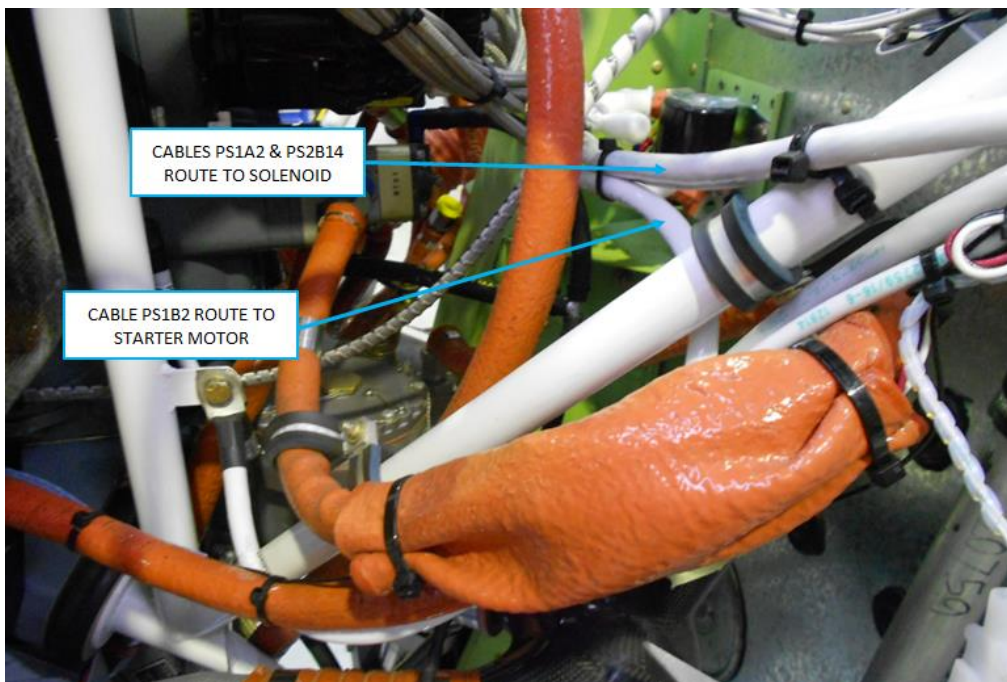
Cable Routing, View Looking Inboard/Aft On Firewall LHS
